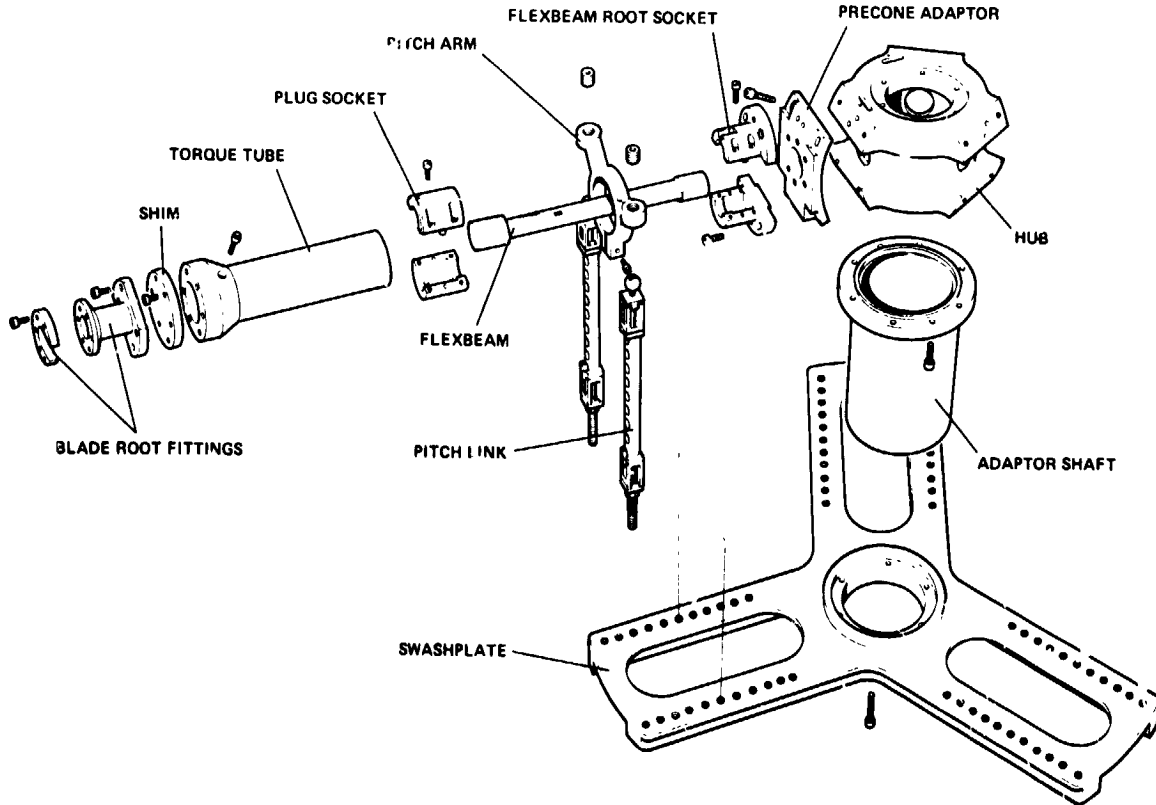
Exploded view of Flexbeam and blade-root hardware.
